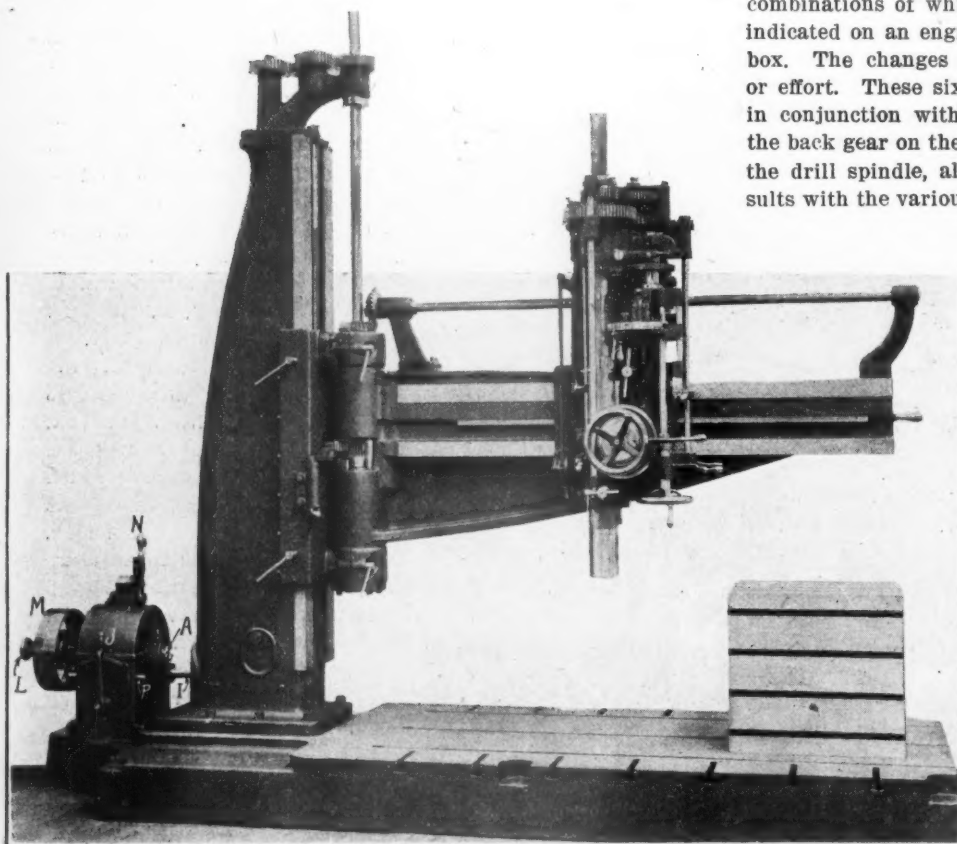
VIEW OF THE 6-FT. FOSDICK RADIAL DRILL AS EQUIPPED WITH THE NEW VARIABLE-SPEED GEARED DRIVING MECHANISM—FOSDICK MACHINE TOOL COMPANY.
